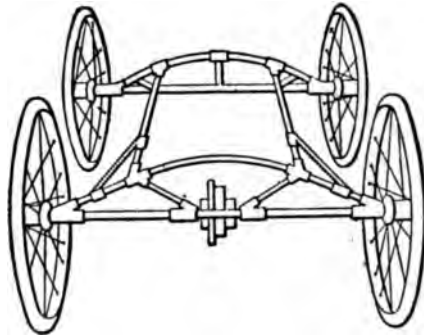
STANLEY TUBULAR FRAME USED ON A NUMBER OF LIGHT CARS.
